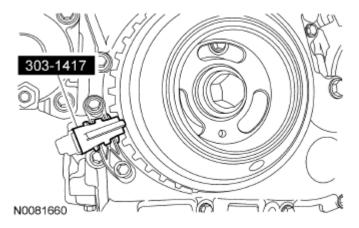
Adjusting CKP Sensor Using Crankshaft Sensor Aligner Courtesy of FORD MOTOR CO.
